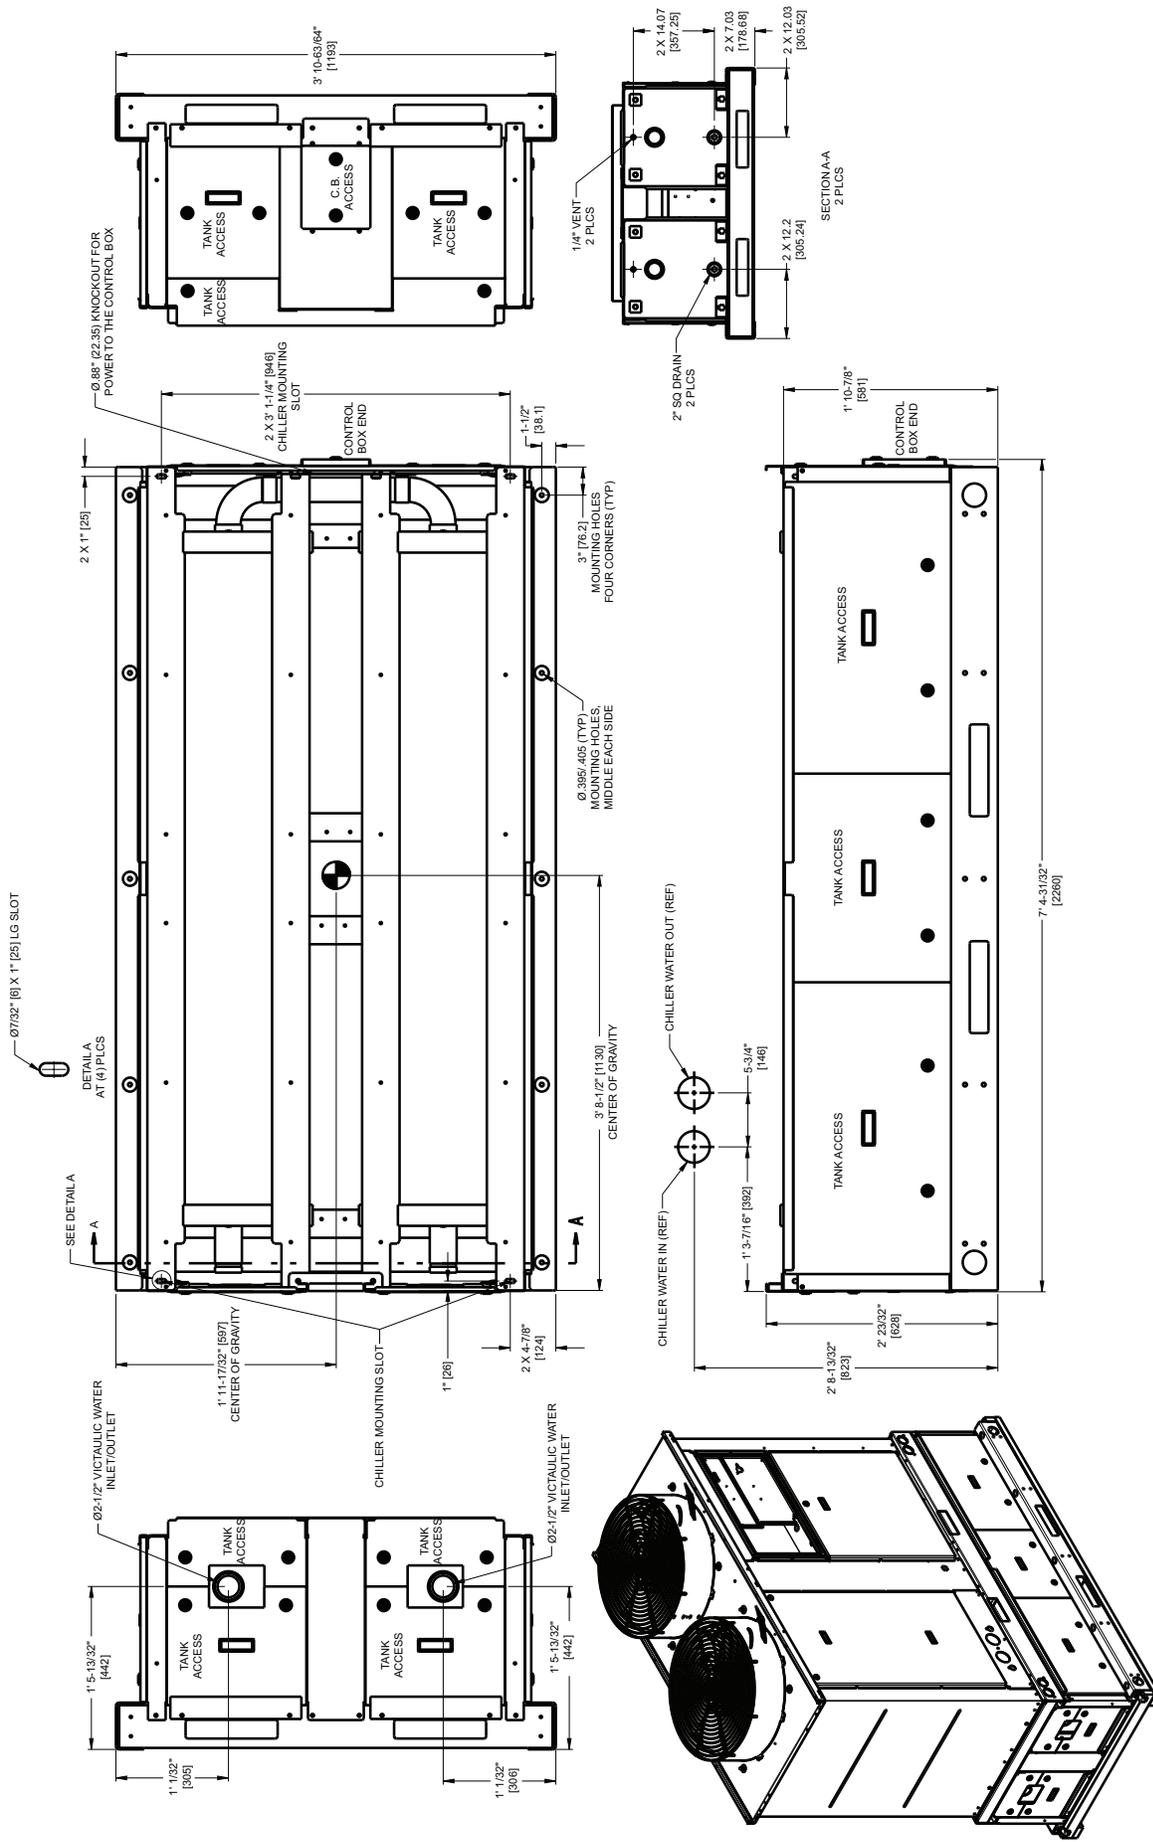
Accessory Storage Tank Dimensions — 30RAP018-030 Units
